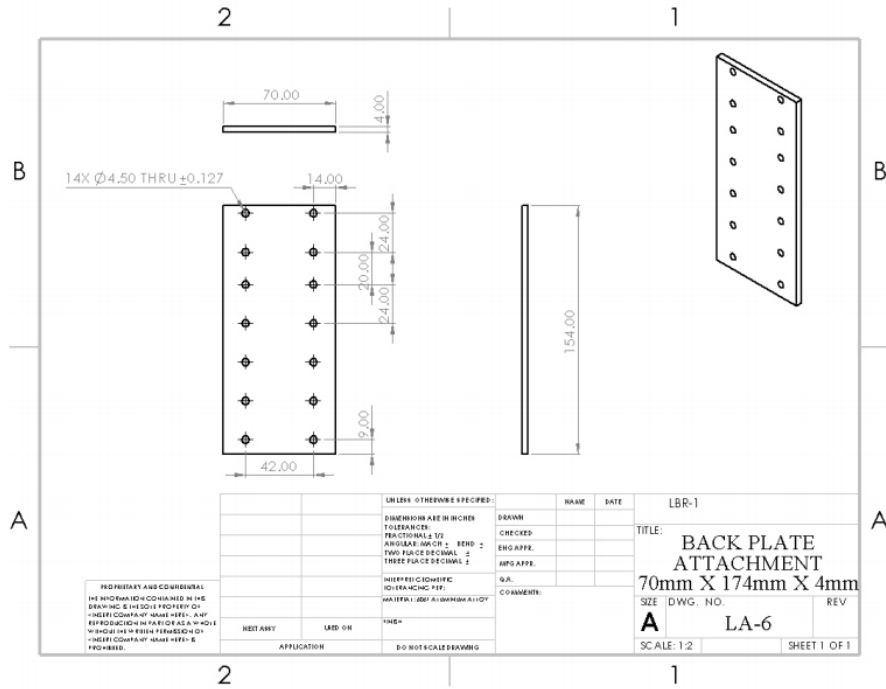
Part drawing of the back plate attachment that holds the linear actuator and extrusion together.
